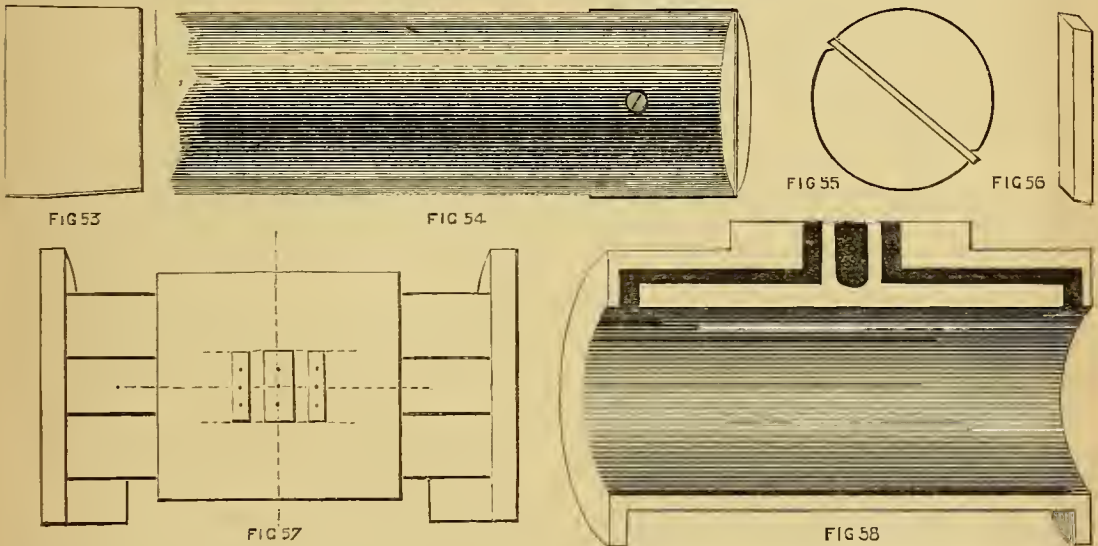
CUTTER FOR BORING BAR. FIG. 54.—BORING BAR. FIG. 55.—END VIEW OF BORING BAR. FIG. 56.—ALTERNATIVE FORM OF CUTTER. FIG. 57.—FACE OF CYLINDER, SHOWING POSITION OF STEAM AND EXHAUST PORTS. FIG. 58.—SECTION OF CYLINDER, SHOWING STEAM WAYS.
